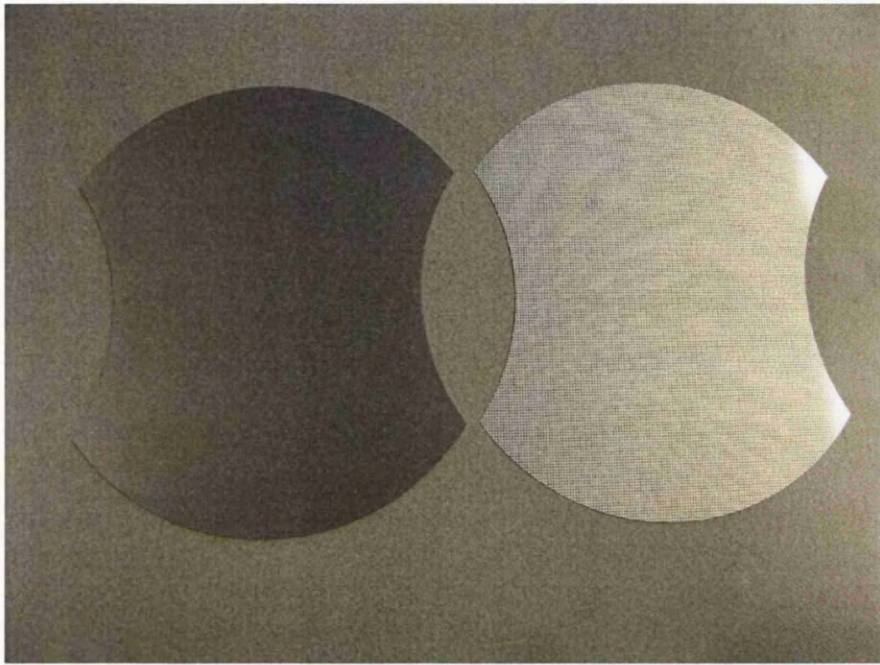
IF Steel Mask (left) with packaging Steel with 1mm Grid (right).
